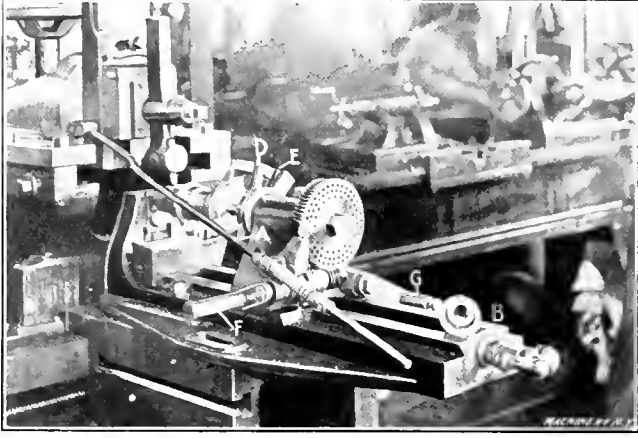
Shaper Attachment for Cutting Bushings with Solid Keys
